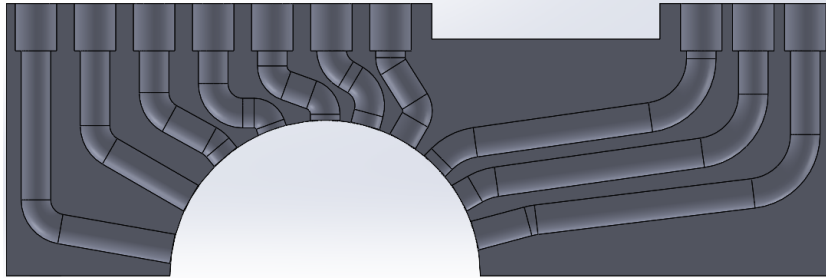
Cross-sectional view of the bearing (part 1 in Figure 2.8) showing the internal pressure tubes.
